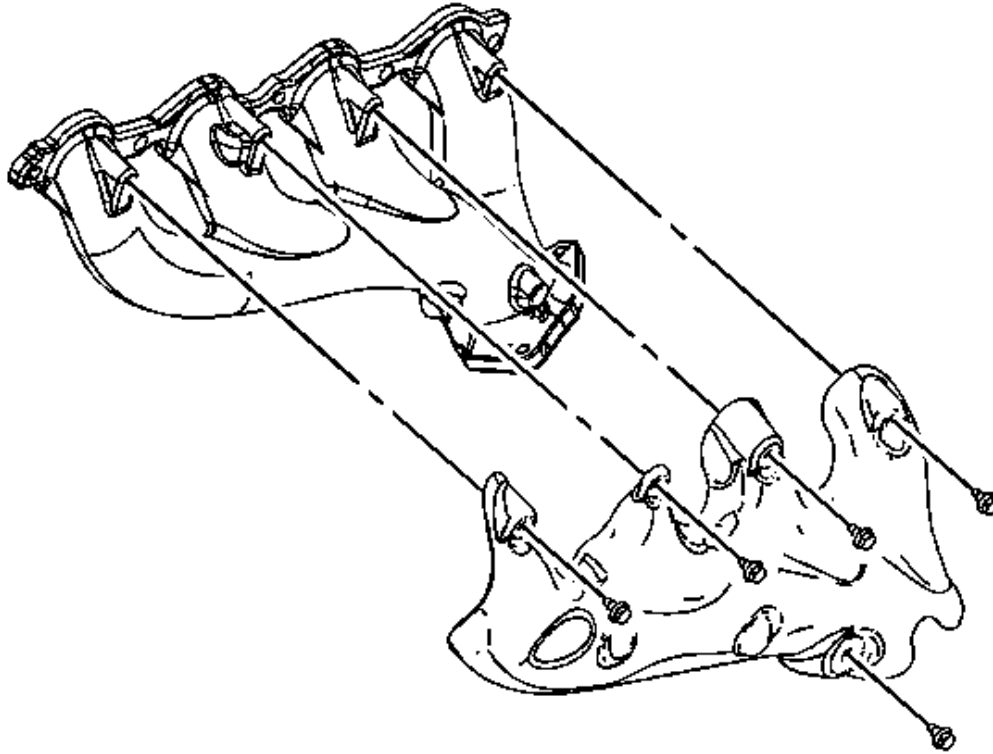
View Of Exhaust Manifold Heat Shield & Bolts
